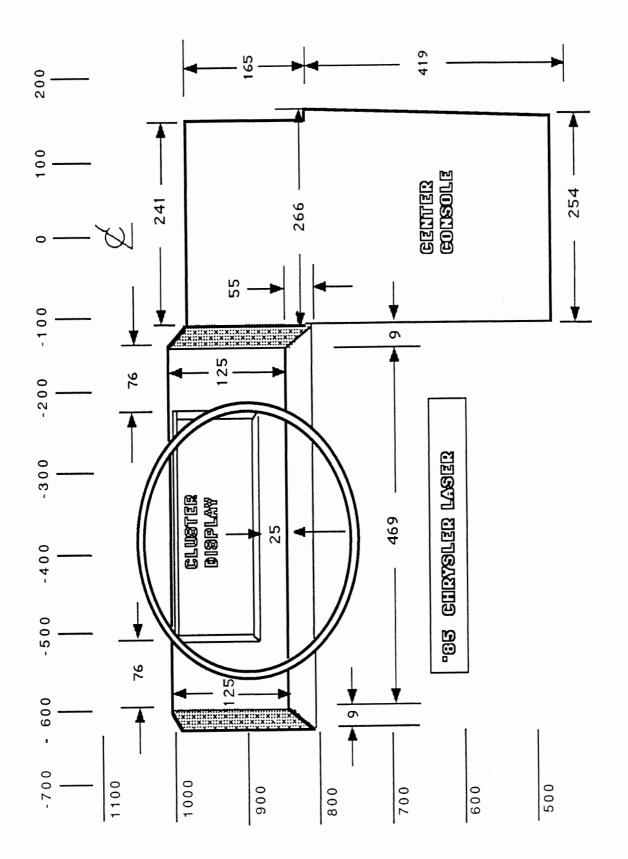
, Front View of Instrument Panel (All measurements in millimeters.)
